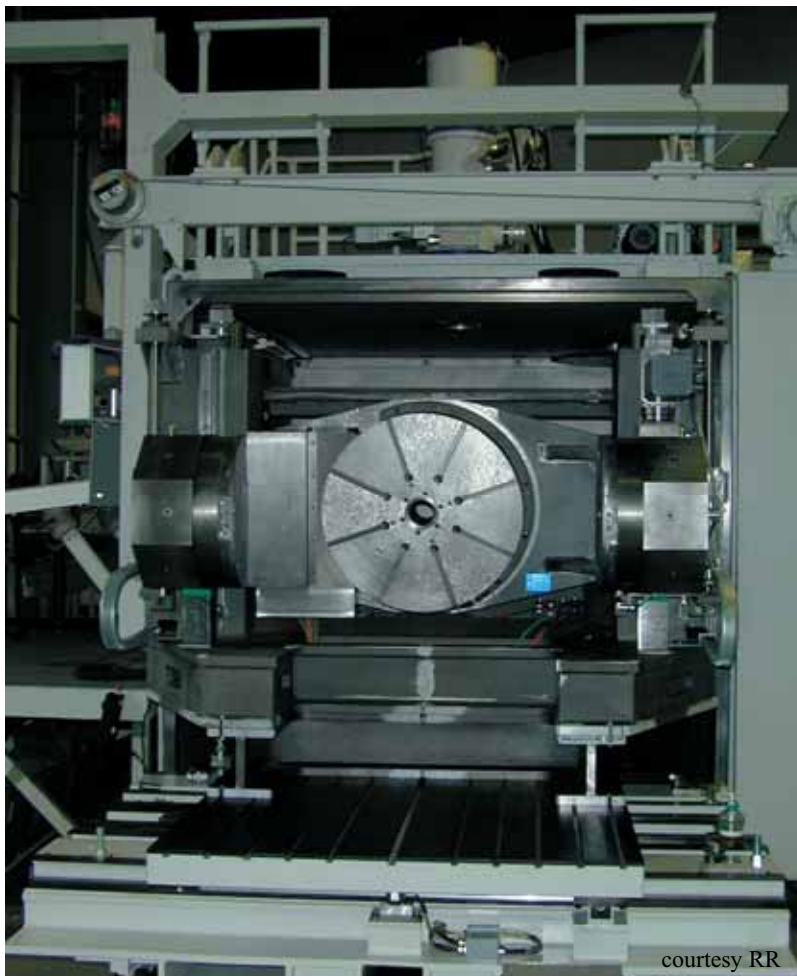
Typical 4-axes manipulator of above machine: x-y table with rotating and tilting device.
